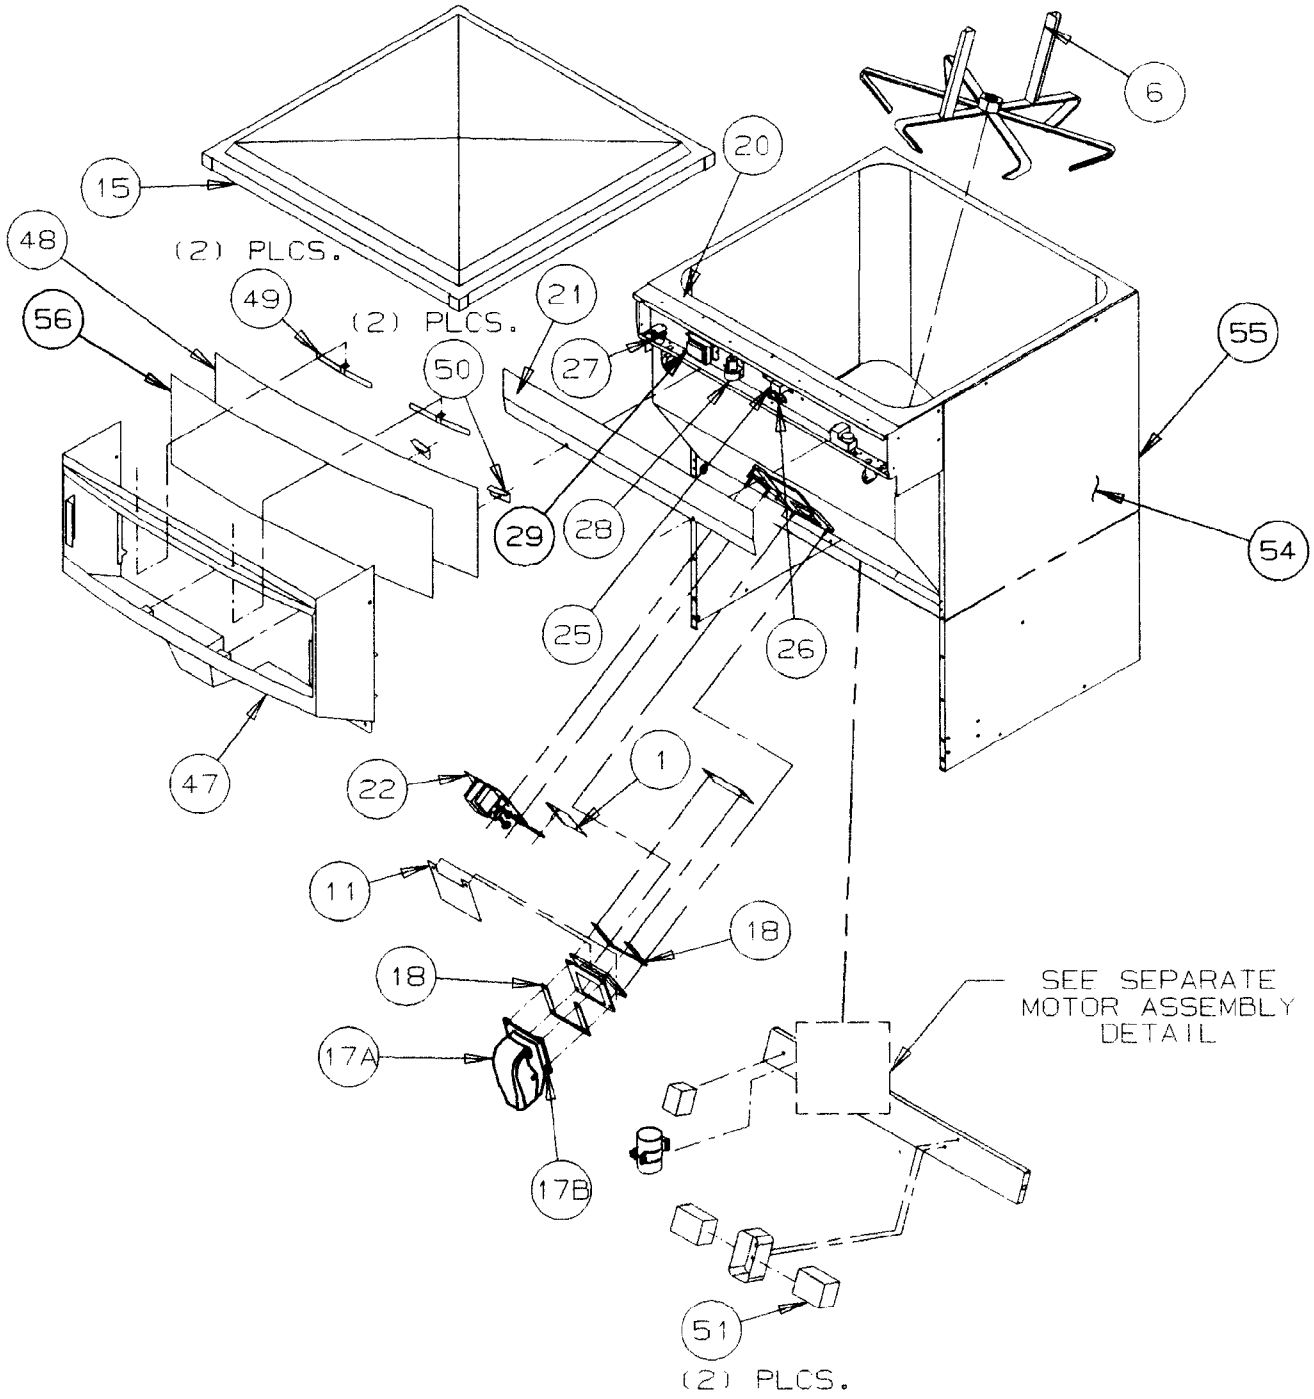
EXPLODED ASSEMBLY (UPPER)
